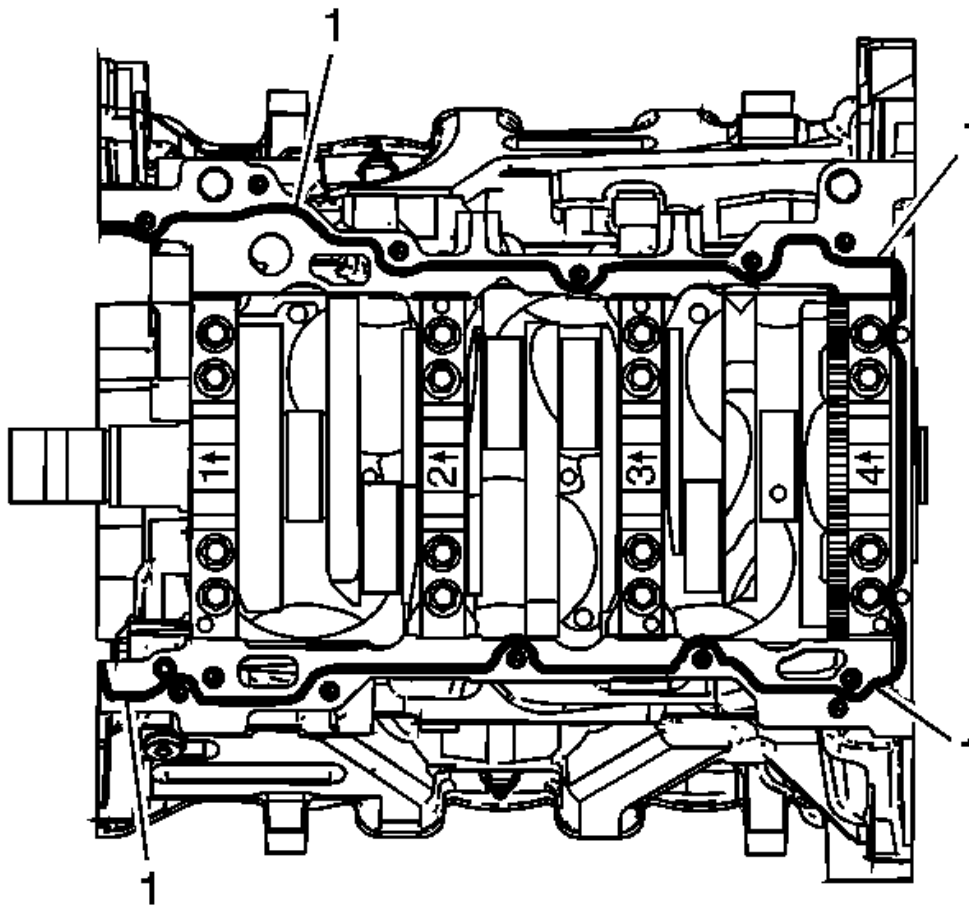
Identifying Sealant Application Locations On Block Pan Rail & Crankshaft Rear Oil Seal Housing
